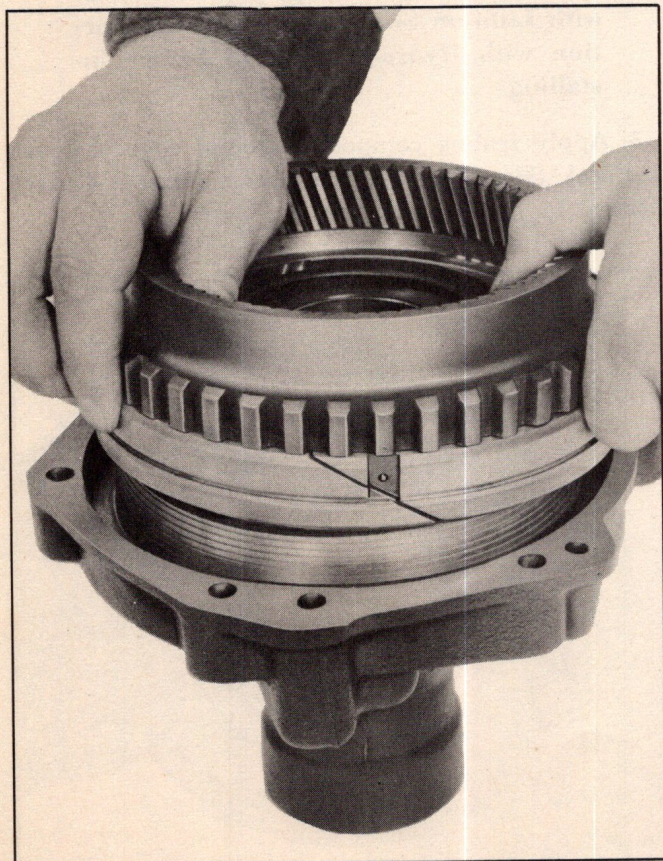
Installing Reverse Internal Gear and Stationary Cone
